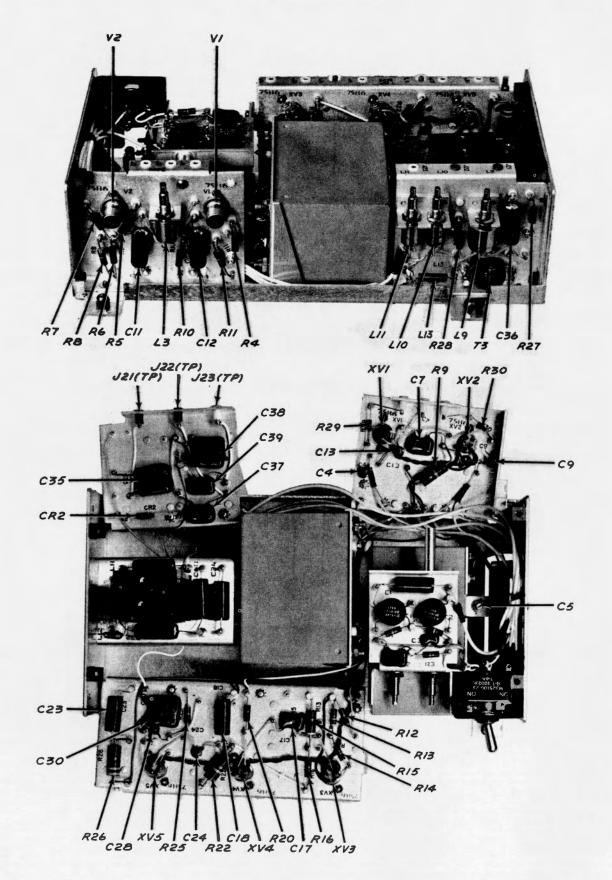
2nd Injector (A) A1A12, Parts Location and Test Points, Disassembled
